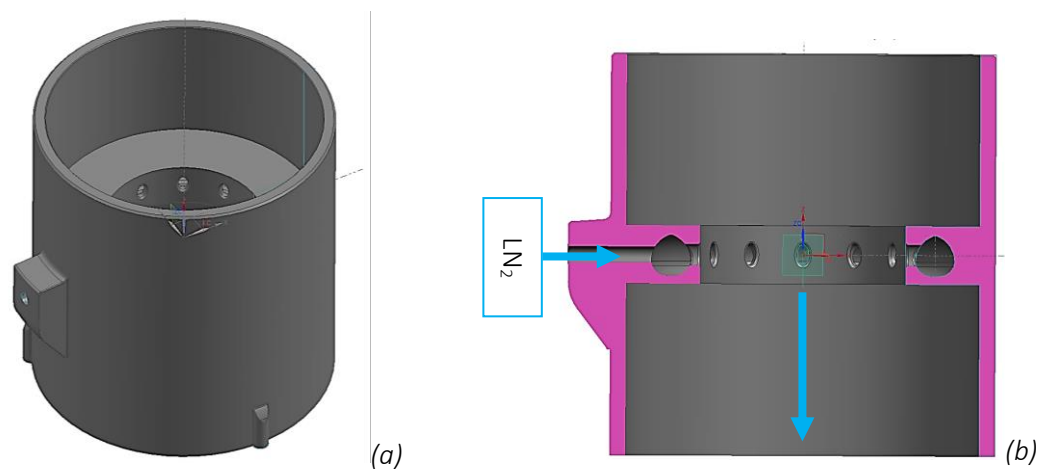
(a) CAD Isometric view, (b) Section view
